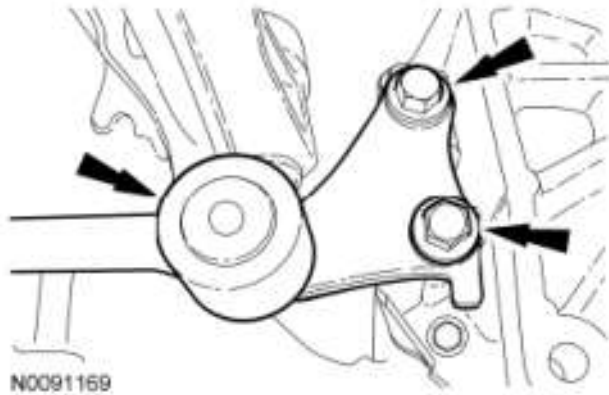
Locating Bolts, Roll Restrictor And Bracket
